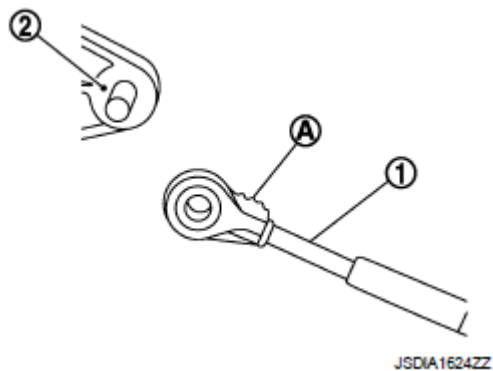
Identifying Control Cable, CVT Shift Selector Assembly And Rib
